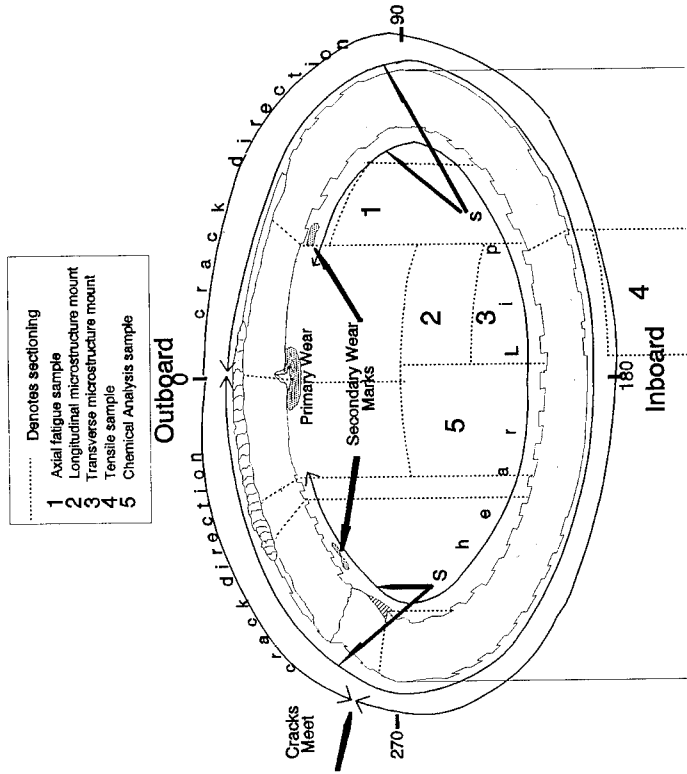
Schematic of the lower fracture half containing all important fractographic features of the failed bolt.
